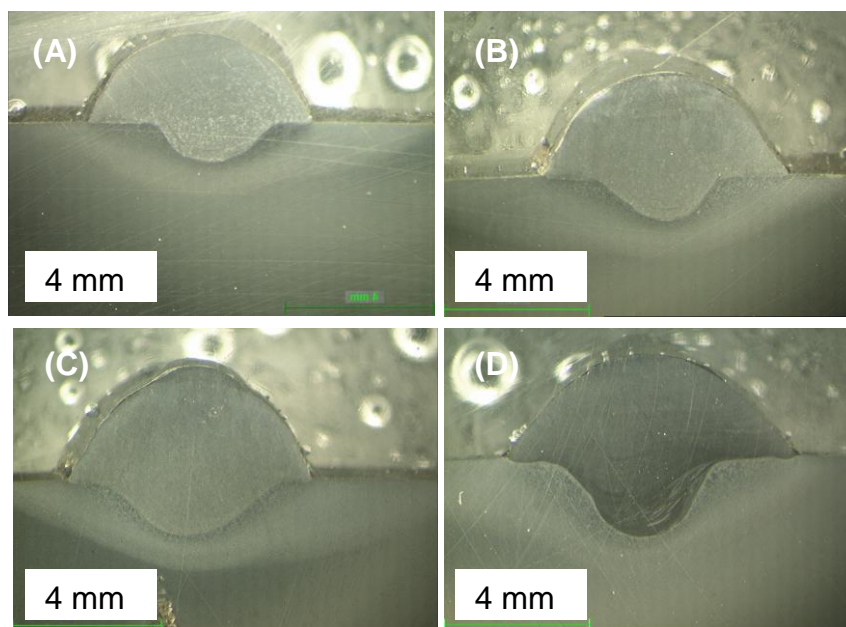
Macrographs of CMT weld with 5 m/min WFS (top) and equivalent laser assisted weld of 6 kW laser power, 20 mm spot size and 20 mm process distance (bottom)
